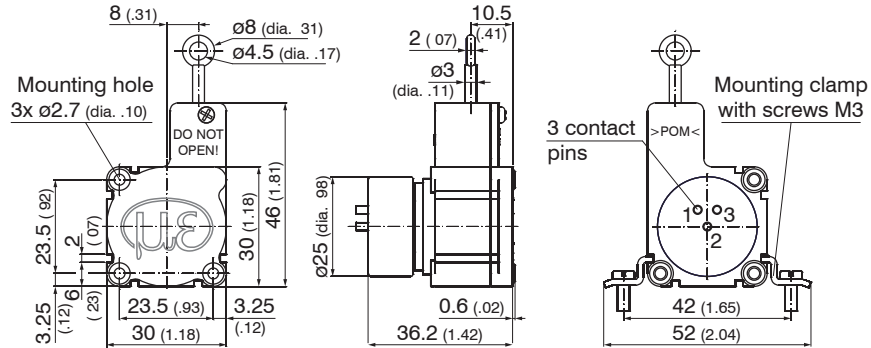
Dimensional drawing WPS- ... -50MK30 with potentiometer or encoder, dimensions in mm (inches), not to scale
